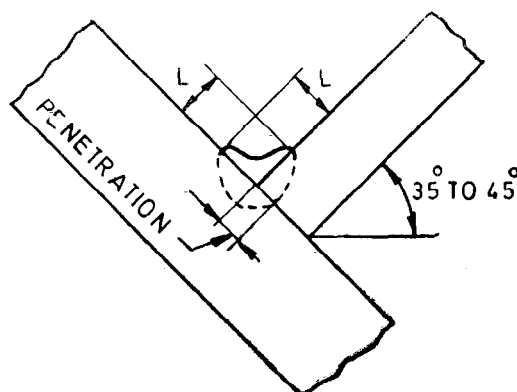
FILLET WELD IN FLAT POSITION
